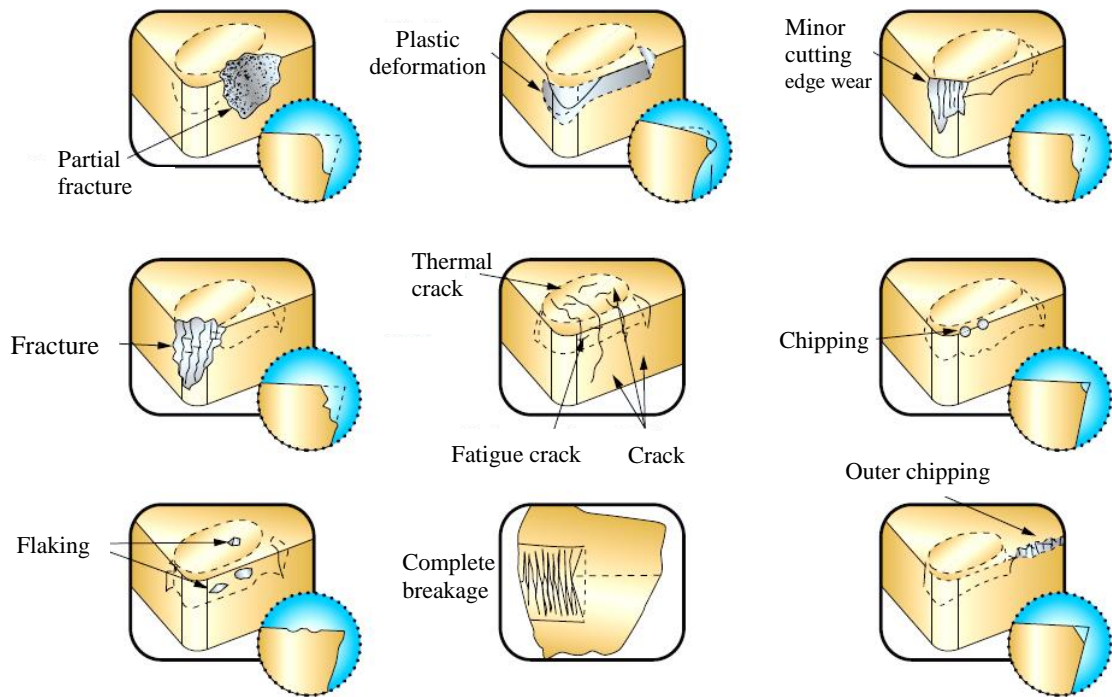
Some other types of tool wear in cutting tools (Sowa Tools and Machines Co. Ltd, 2010).
